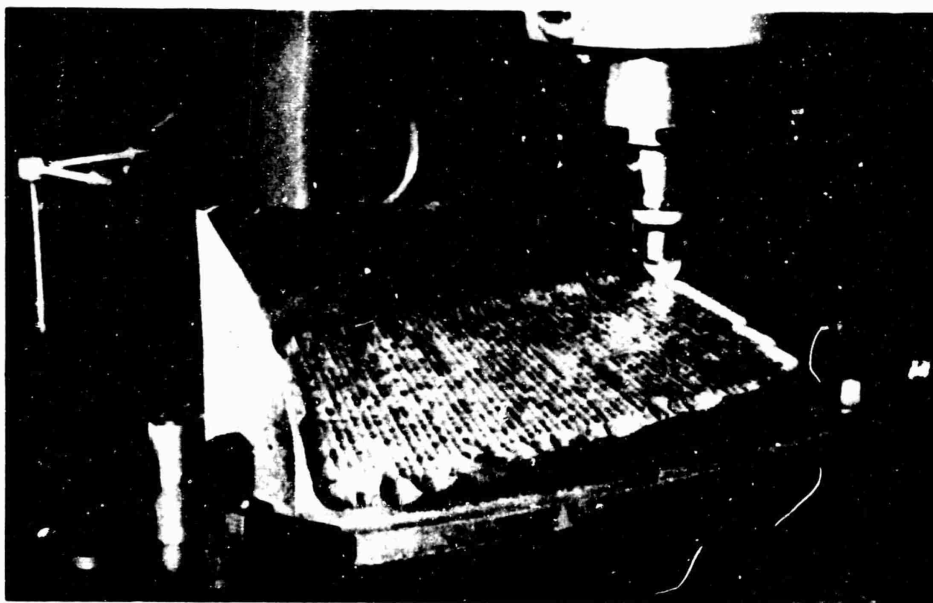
MACHINING MASTER TEMPLATES FOR IMPELLER.
